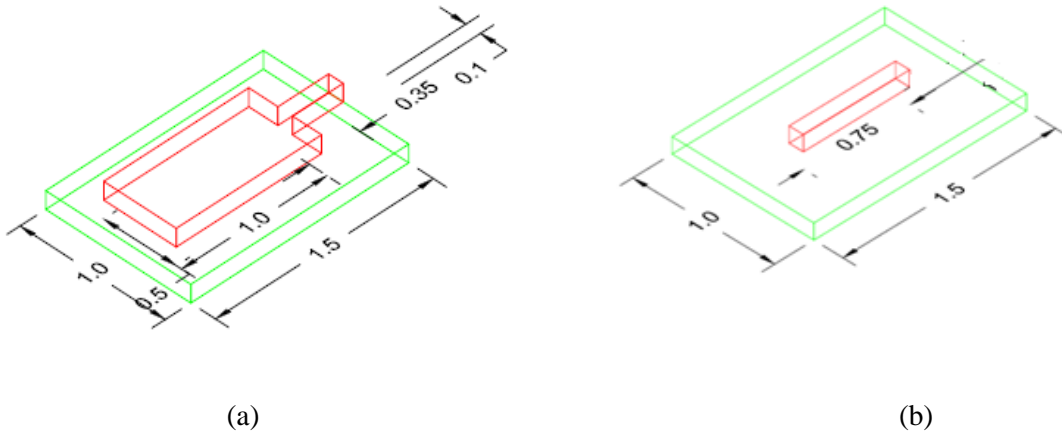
, (a) mold for PDMS lower cladding (b) revised mold for PDMS upper cladding
